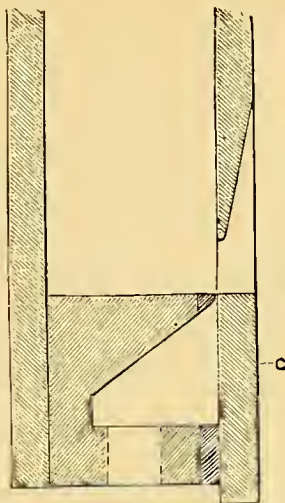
SIDE VIEW OF LOWER PART OF STOPT DIAPASON.
